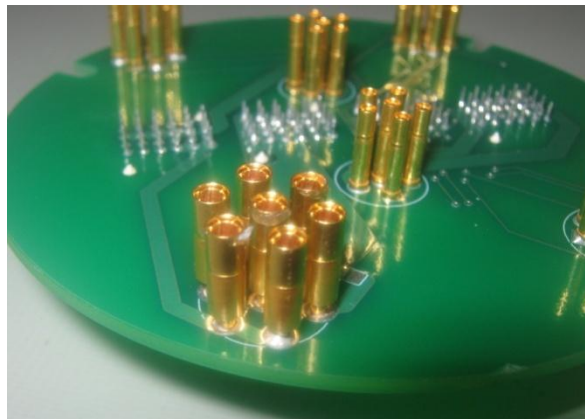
SAMURAI Penetrator Board with Hypertronics Penetrator Pins
